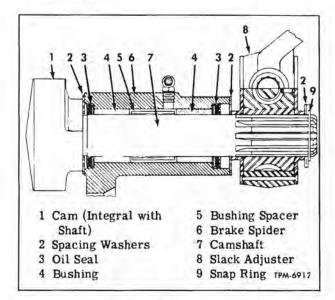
Front Brake Camshaft and Slack Adjuster Mounting
